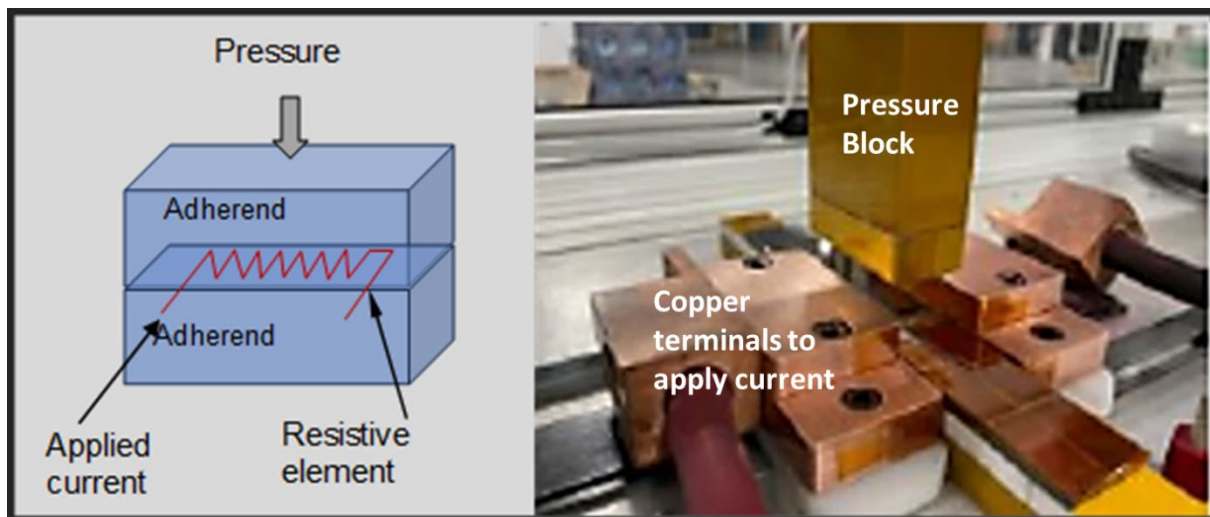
Resistance welding schematic and equipment used for this study.
